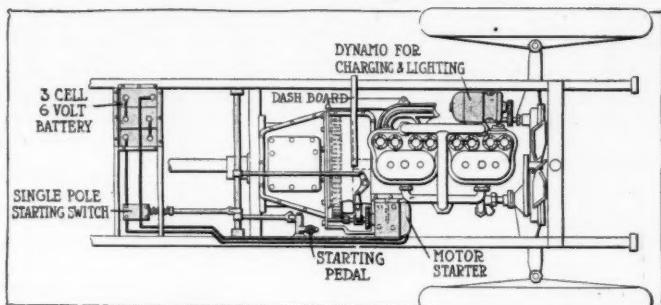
Gray and Davis installation, showing wiring and location of parts
